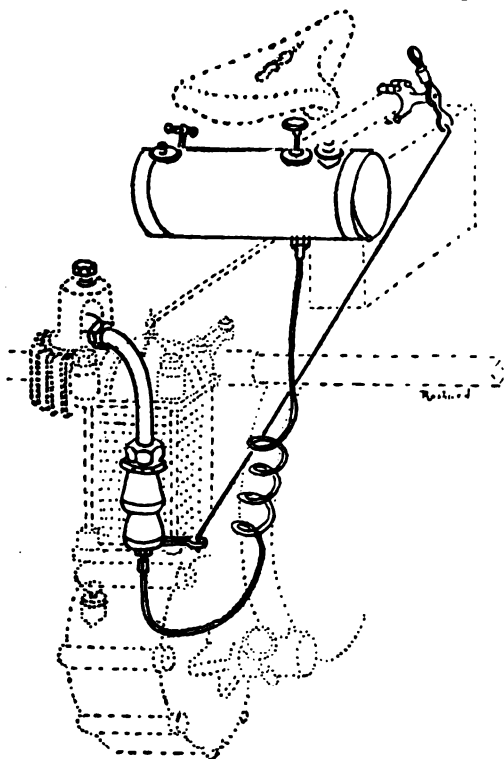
VIEW OF CARBURETTOR AS FITTED TO A TRICYCLE.
